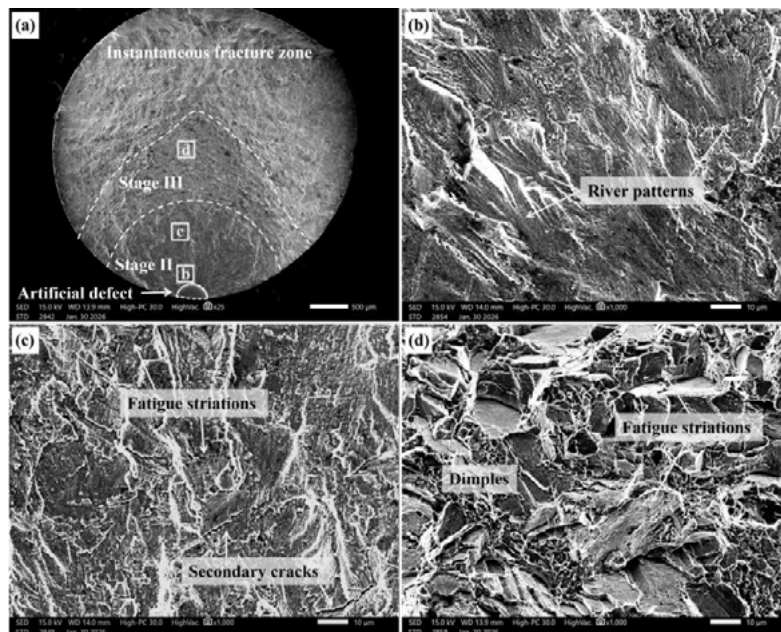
Typical fatigue fracture morphologies of the FGH96 round bar specimen containing a surface defect tested at 600°C under a maximum stress of 900 MPa.
